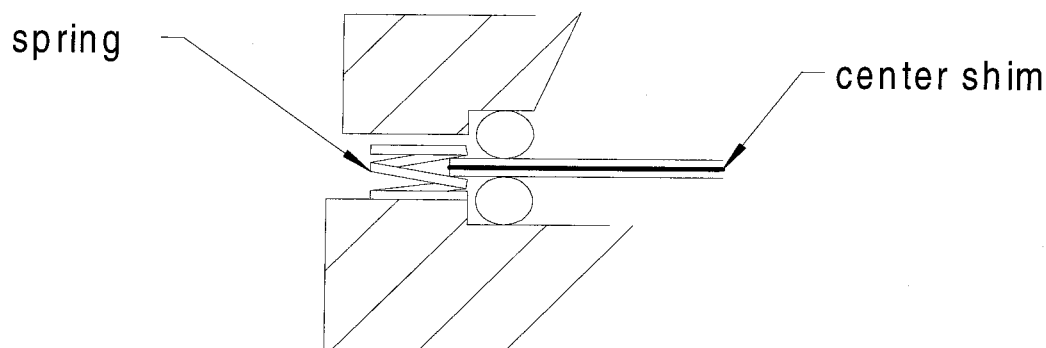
Detailed view of the spring that electrically connects both outer surfaces of the piezoelectric disk to the generator head.
